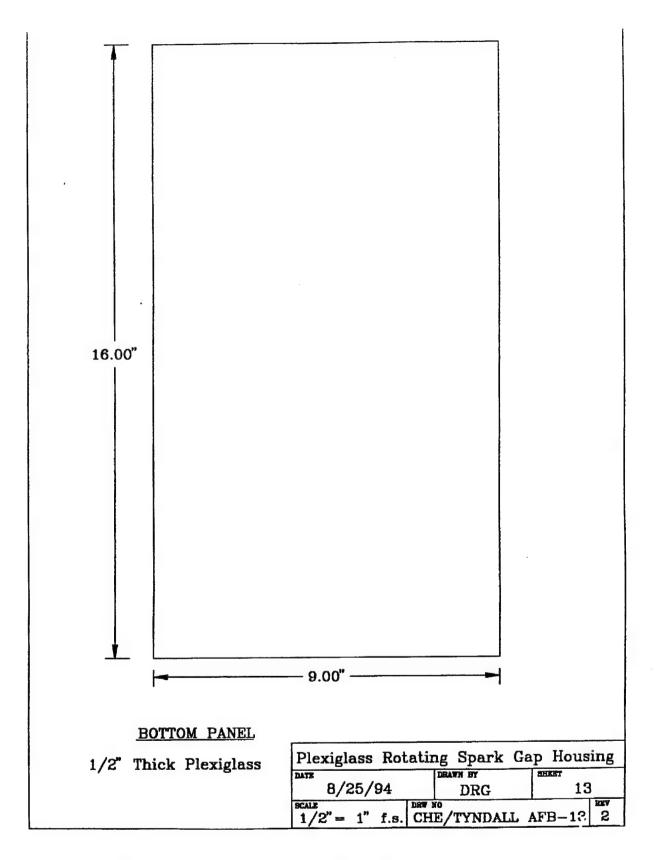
Plexiglas Rotating Spark Gap Housing - Bottom Panel
